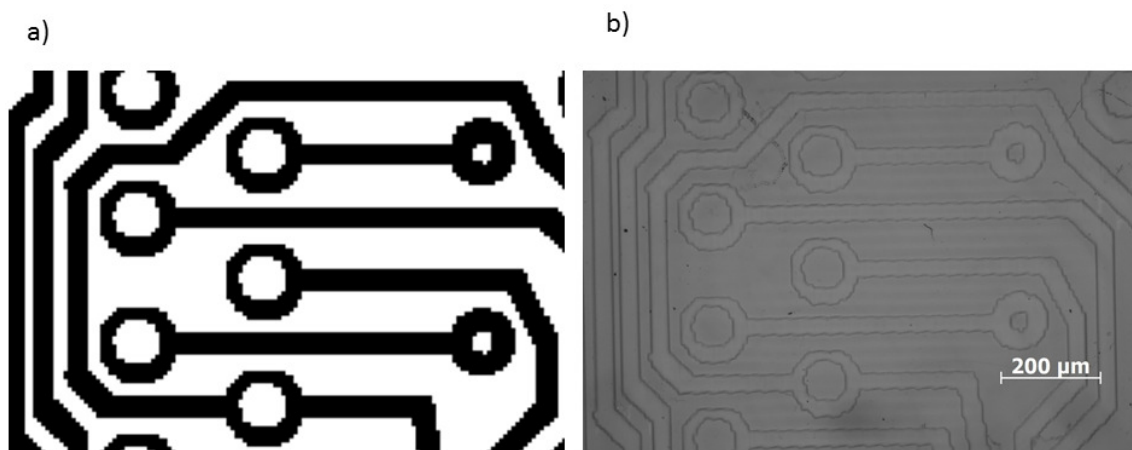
(a) Original image and (b) fabricated PCB pattern.
